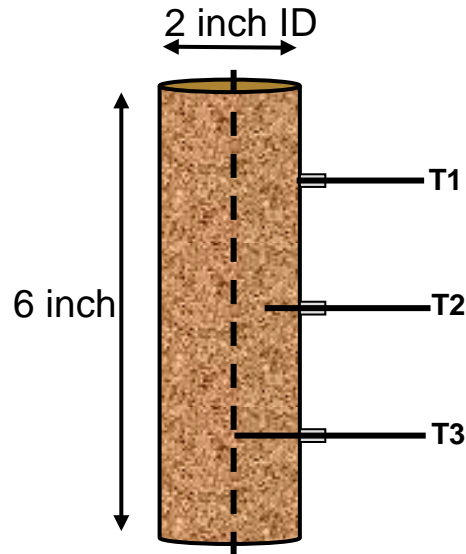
Thermocouple locations (edge-T1, half-radius-T2 and center-T3) within sand-core.
